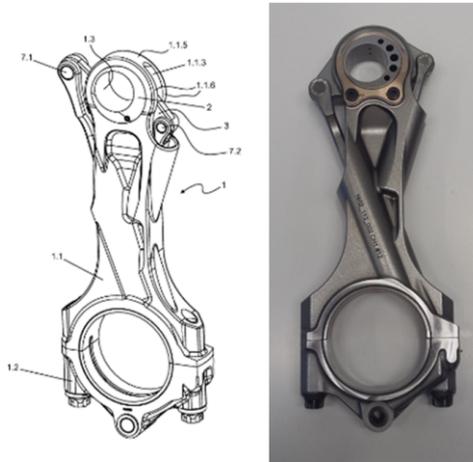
Drawing from patent specification (left) and prototype of the VCR-Pleuel (right) [Prof. Dr.-Ing. K.Wittek, Faculty of Mechanics and Electronics; HS Heilbronn].
